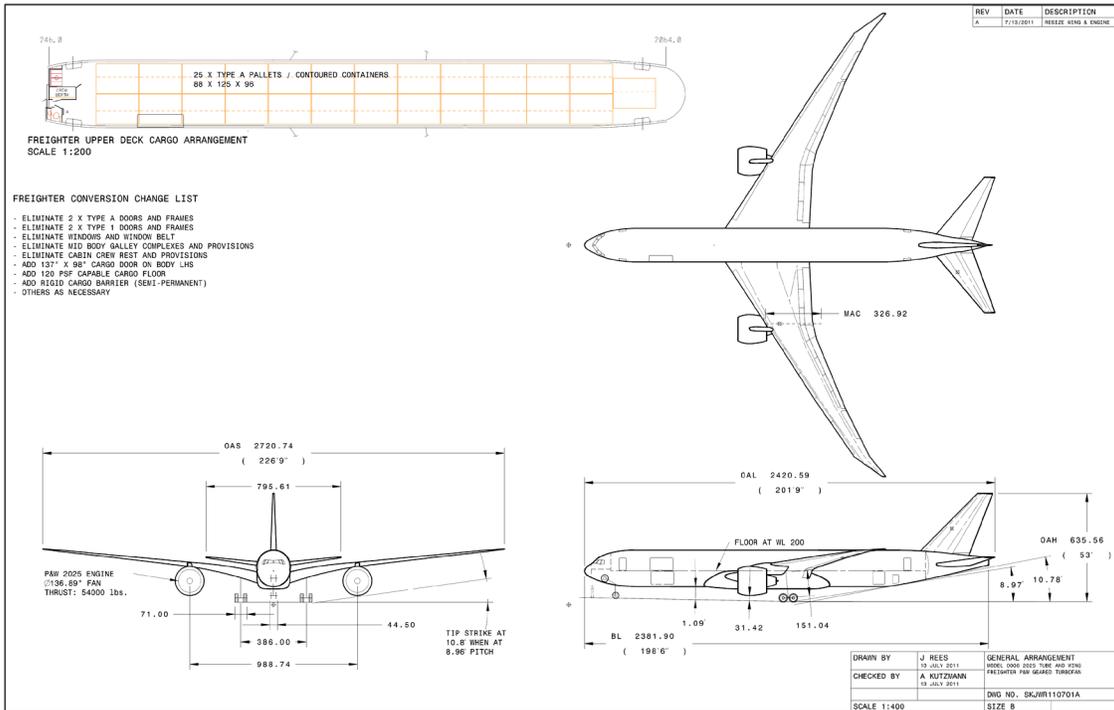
General Arrangement Drawing – 2025 T&W-0006 Freighter
